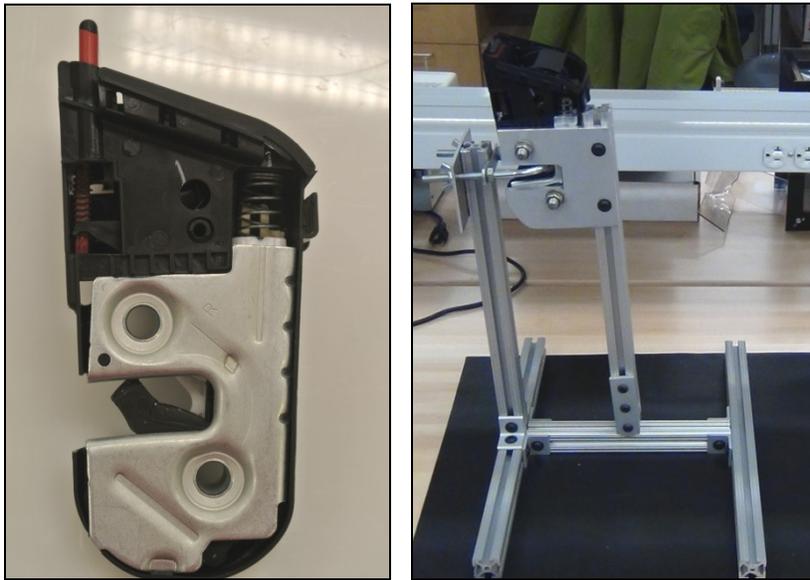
STRATTEC Seatback latch (left) and test fixture (right).
